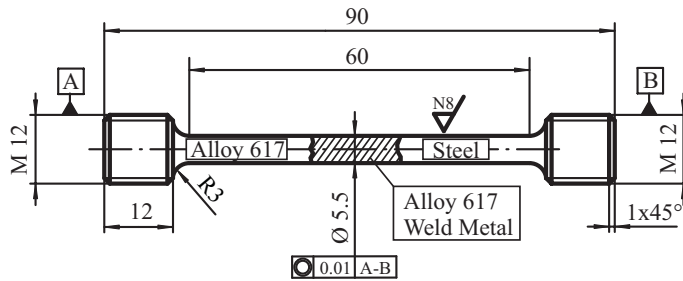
DWM cross-weld specimen geometry arrangement for creep rupture testing. The centre of the weld is positioned in the centre of the parallel gauge length.
